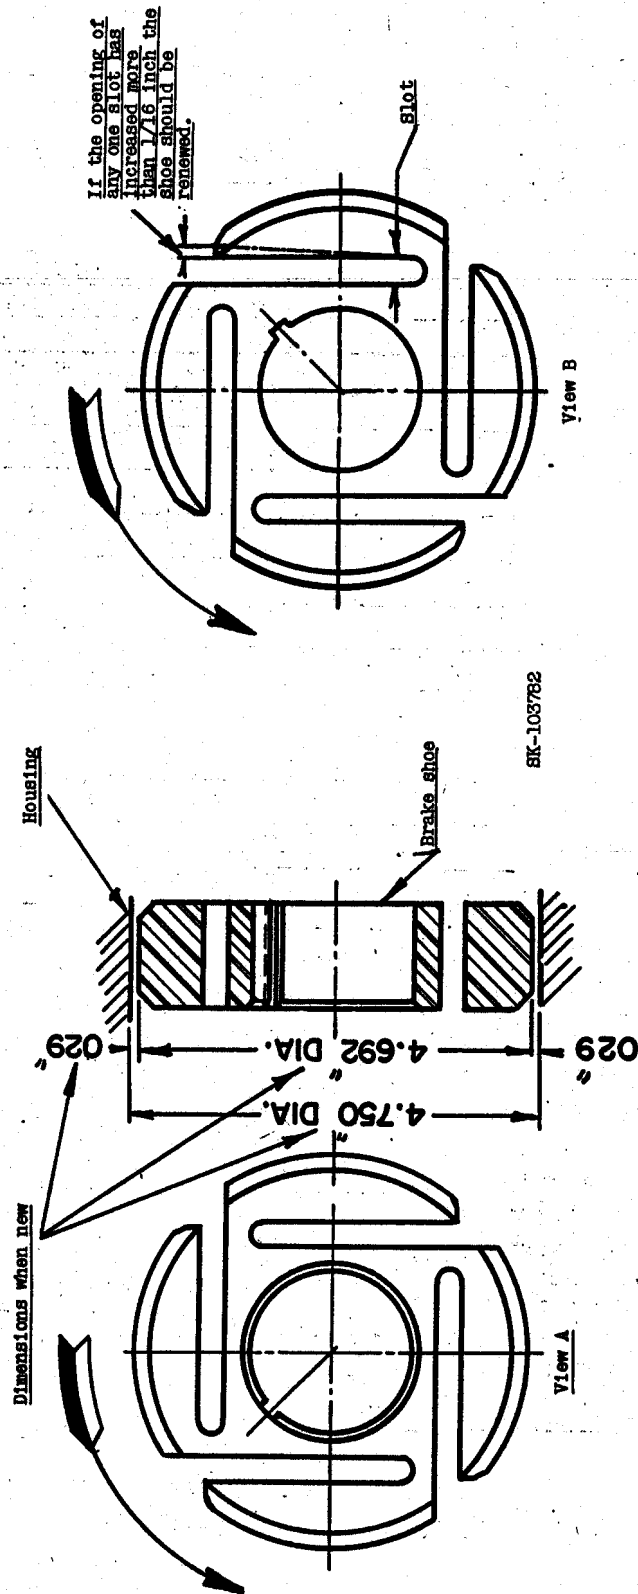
Locomotive Feedwater Heater Brake Shoe Tolerances.
